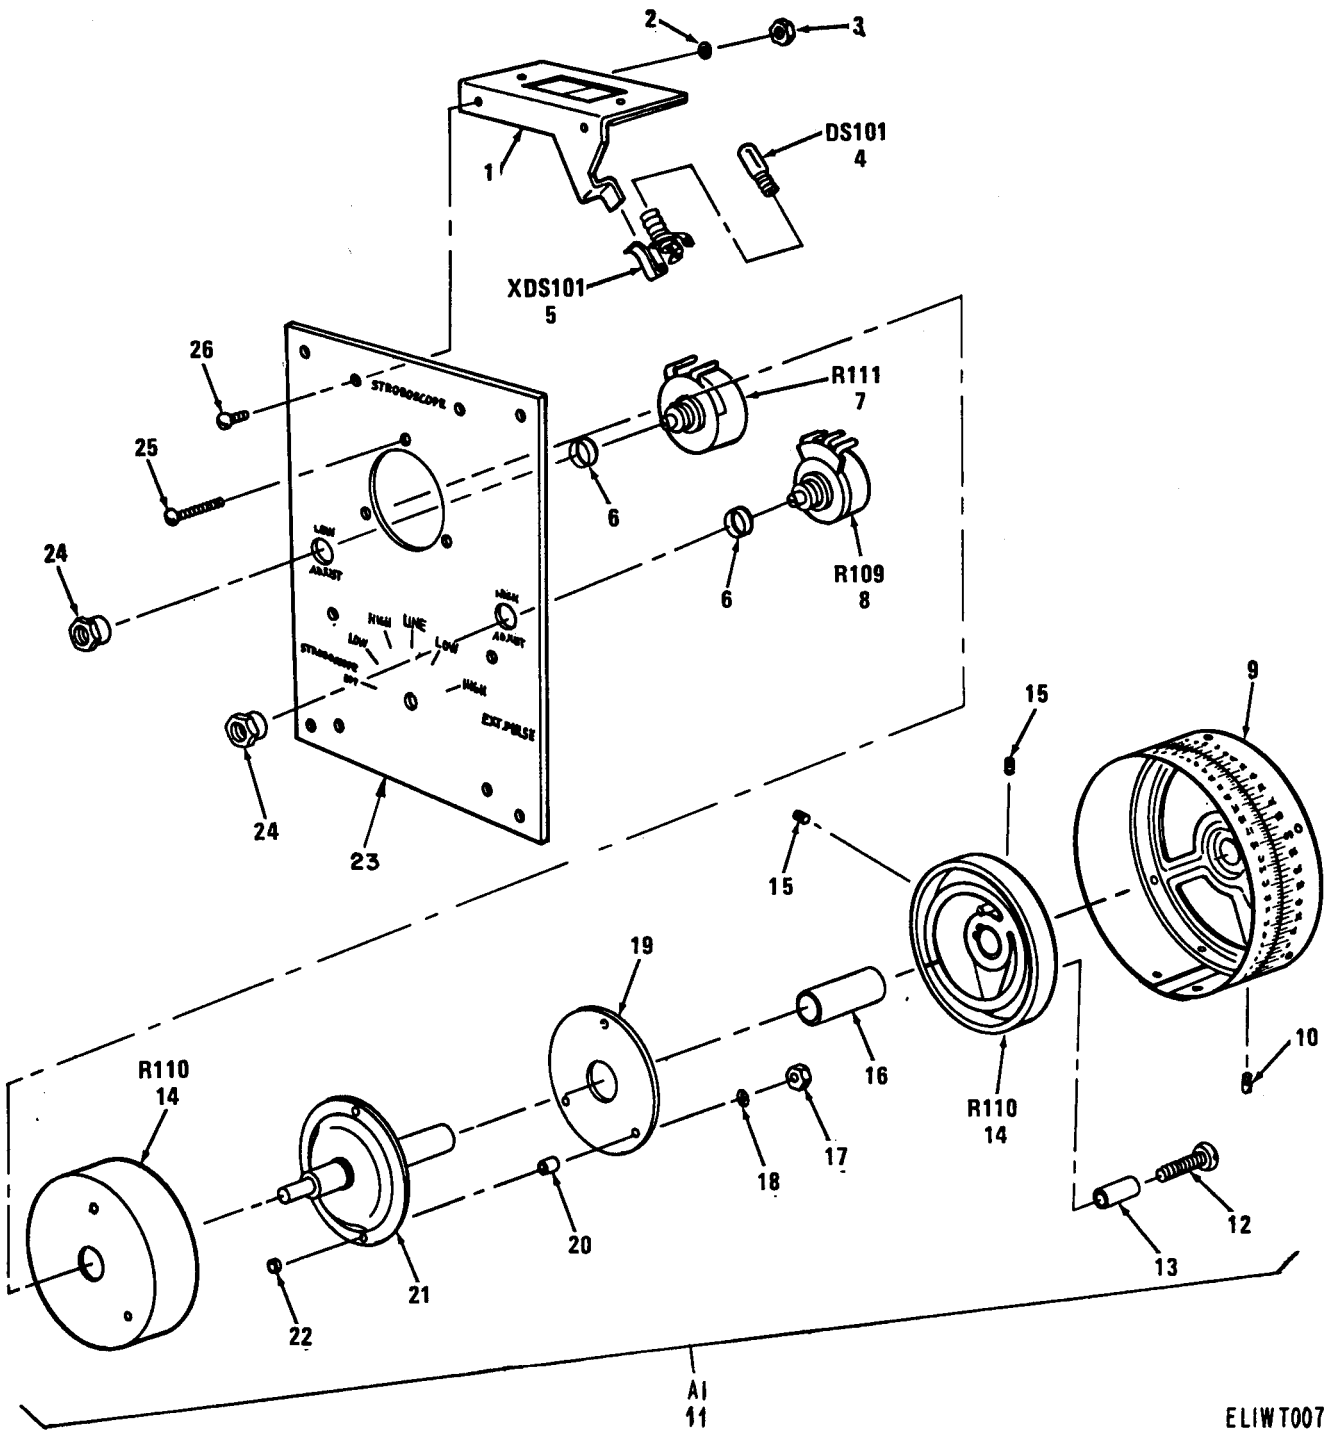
②. Chassis assembly (Sheet 2 of 2).
